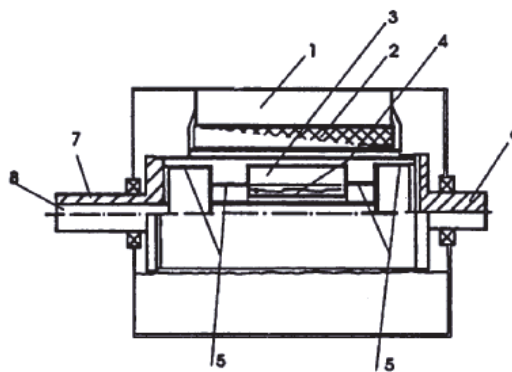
The schematic diagram of the hybrid structured HTS generator. Labels in the figure: 1, Stator iron core; 2, Stator coil; 3, HTS rotor coil; 4, Rotor Dewar; 5, Torsion transmitting tube; 6, Driving shaft; 7, Supporting tube; 8, Axial tube for cooling and current transition.
